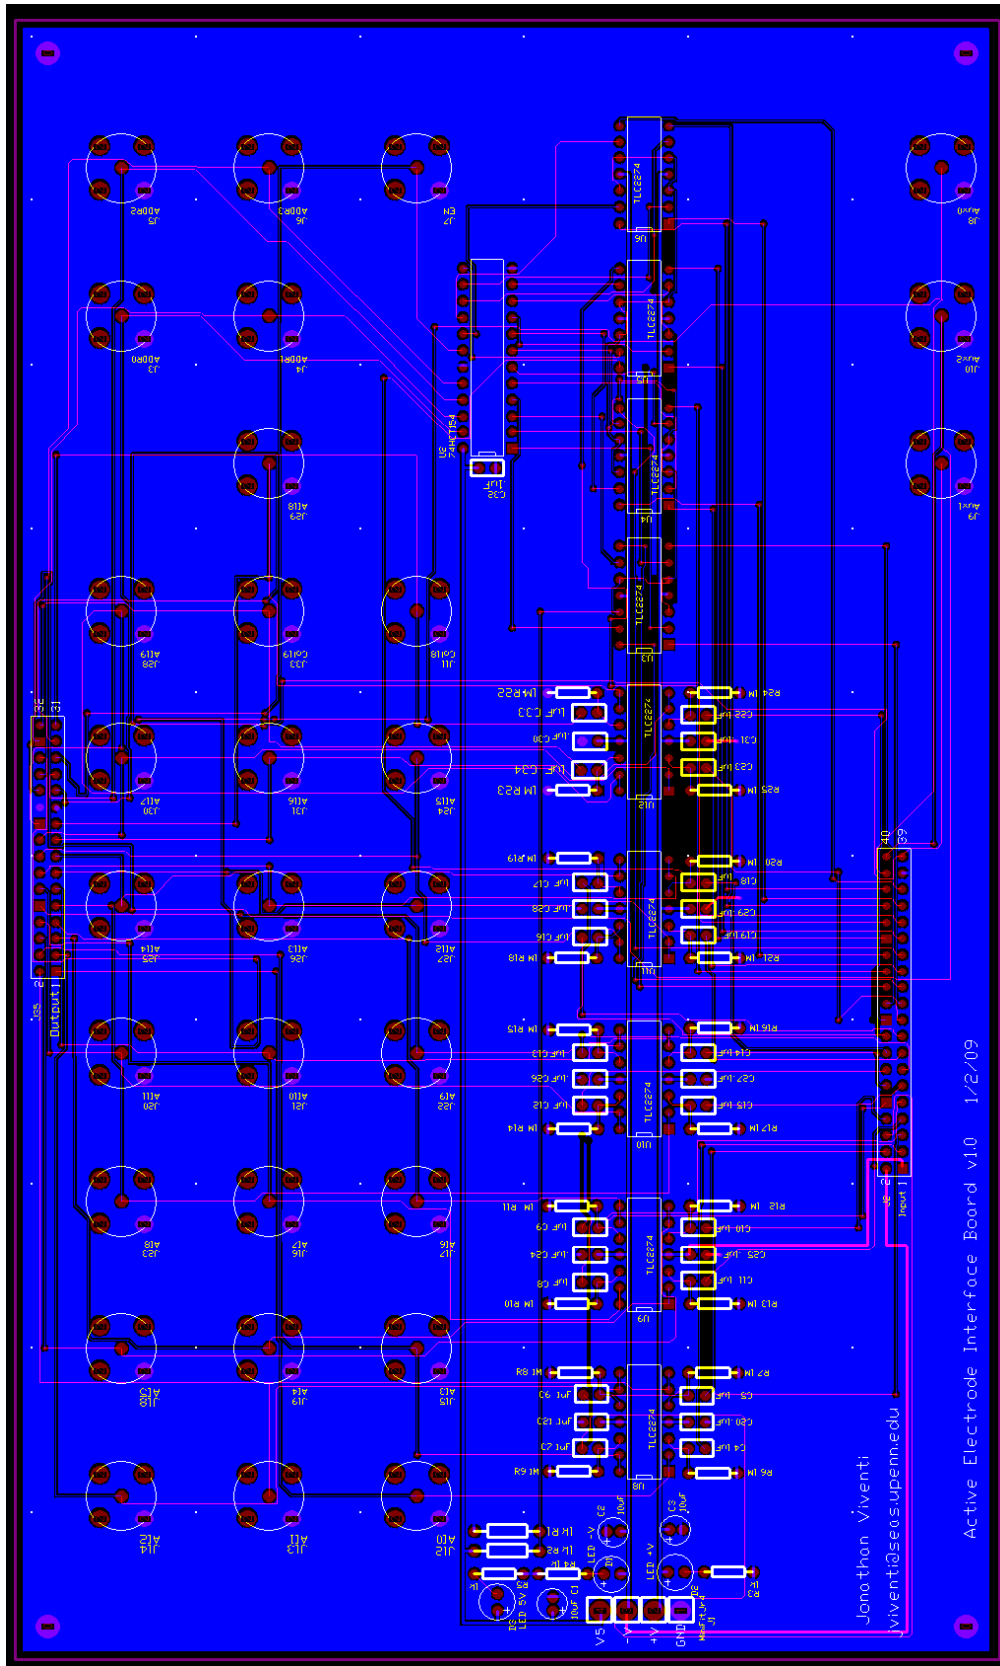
Schematic design and layout of the main interface circuit board, which connects the 40 pin ribbon cable to the acquisition system.
